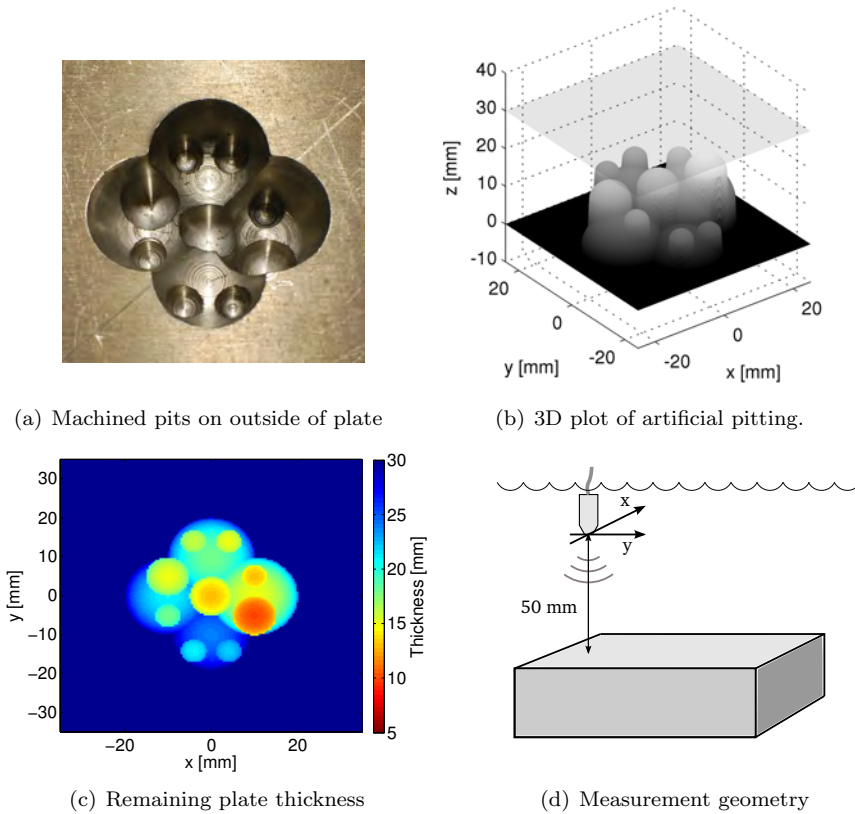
Pitting profile and measurement geometry for experiment with 3D imaging of pitting in aluminium plate.
